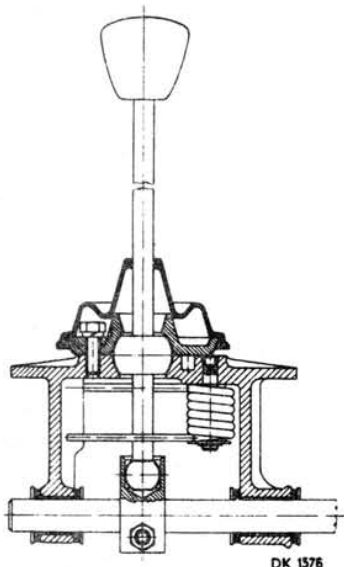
/1 - Sectional View of Gear Lever Housing
